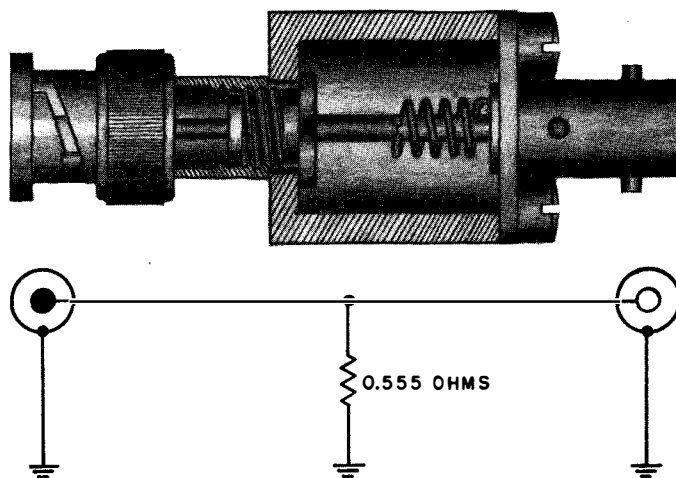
Cut-away and Schematic Drawing of Plug-in Attenuator CN-77/U
